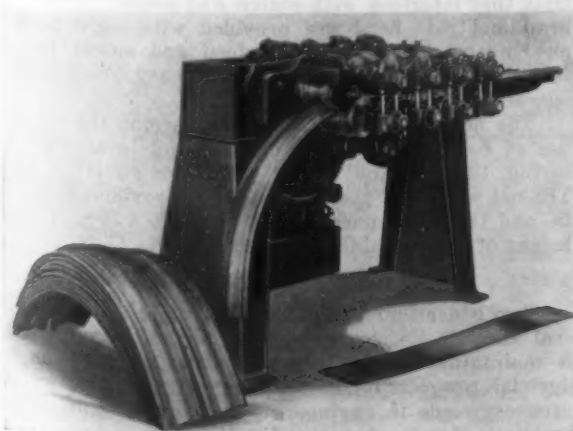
Cold Roll Forming and Bending of Sheets for Radio Loud Speaker Drum. The partly bent drum is later placed in a bending roll
